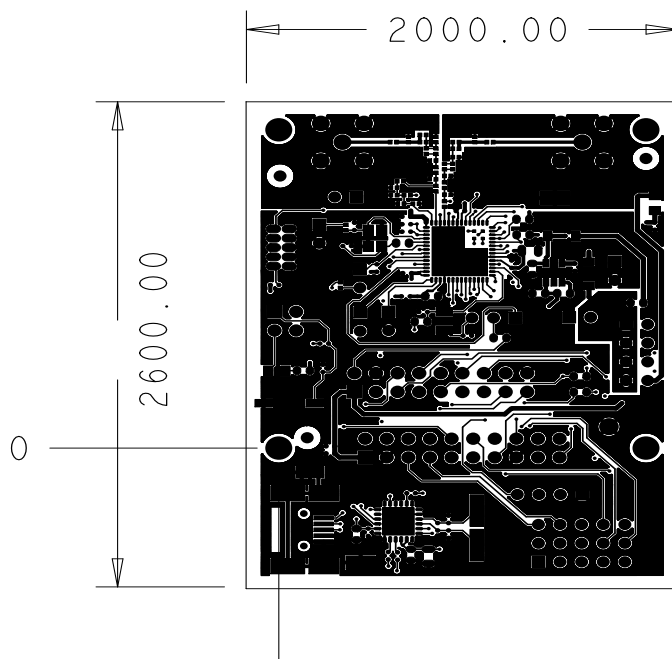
KW01-MRB Top Side (Component Side) Footprint
